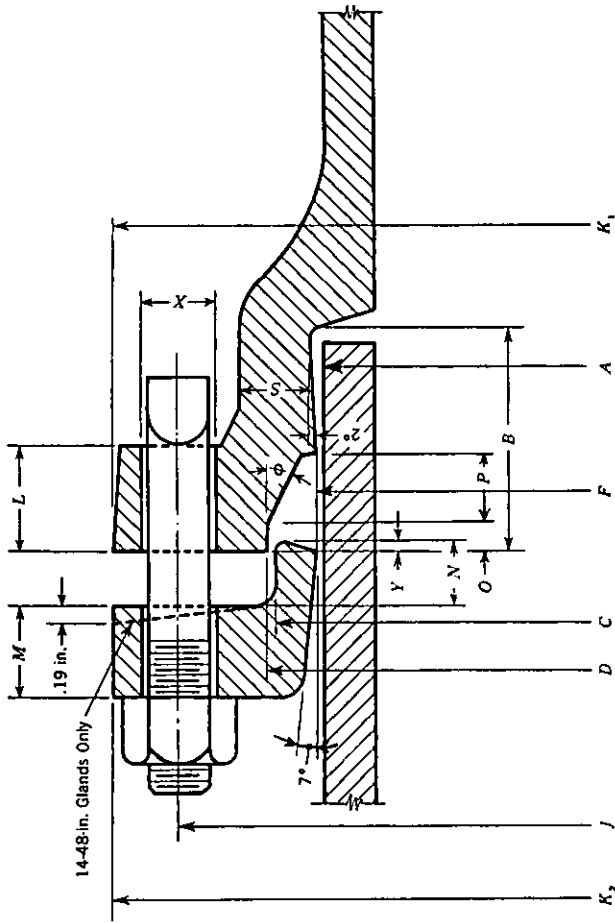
2-48-in. Standard Mechanical-Joint Dimensions (See Table 11.1)
